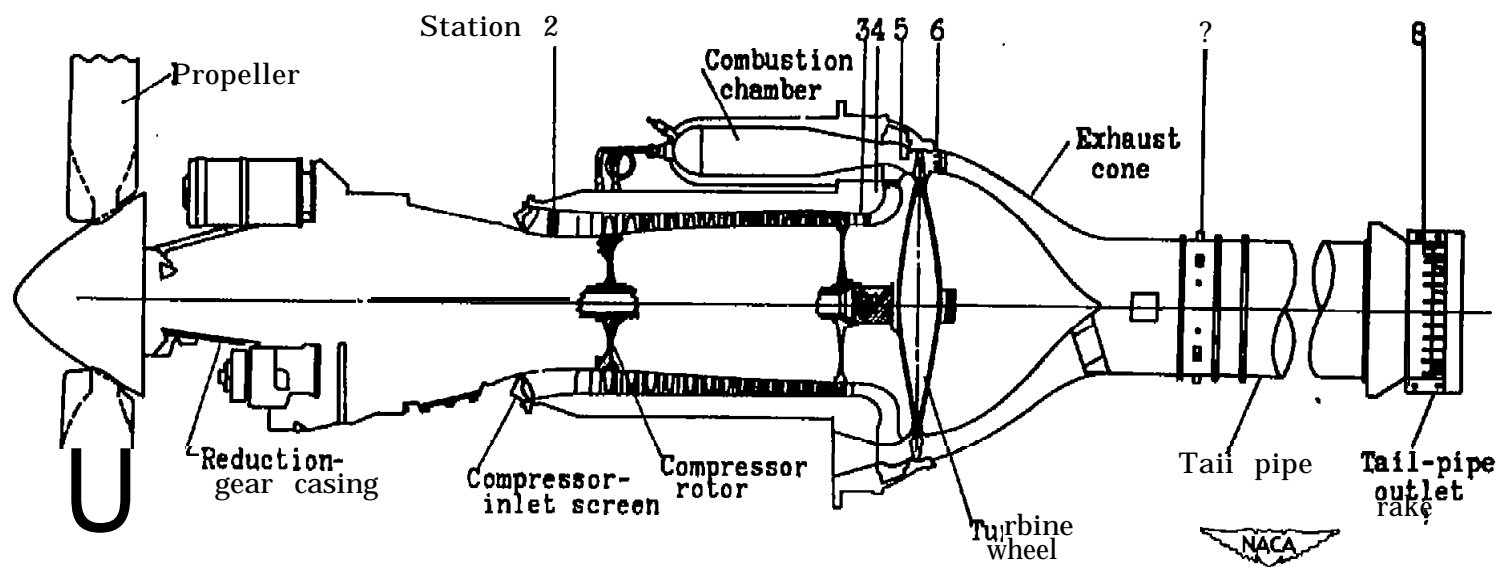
Side view of axial-flow gas turbine-propeller engine showing location of measuring stations.
